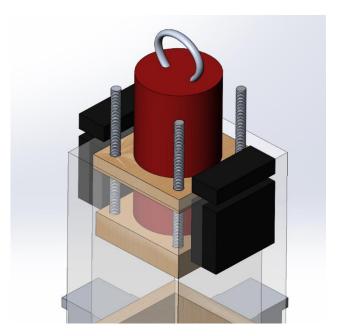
Electromechanical Lock Attached to ARRD Housing
